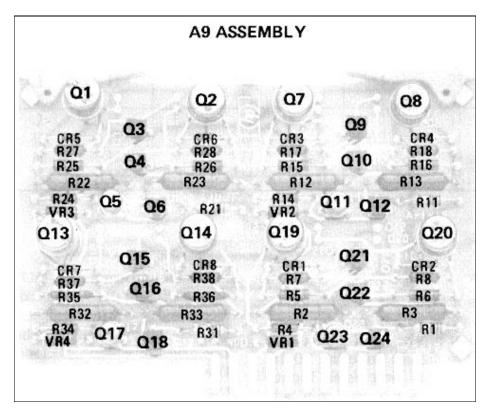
A9 Attenuator Driver Assembly Component Locations.
